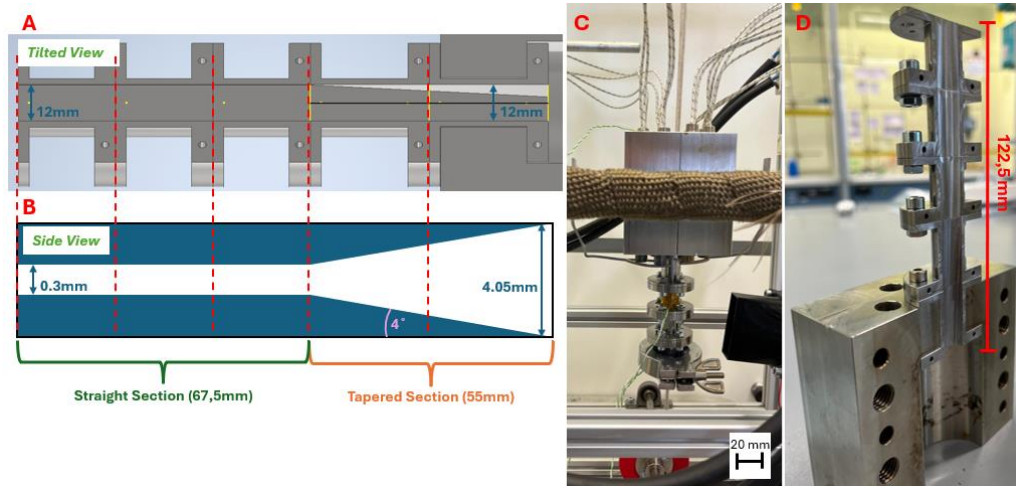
(a) Tilted view of one half of the die, showing the 5 sections making up the modular die. (b) Side view representing the inside of the assembled pultrusion die. (c) Photo showing the assembled impregnation system with the longest die configuration. (d) Photo showing half of the impregnation system with the longest die configuration.
